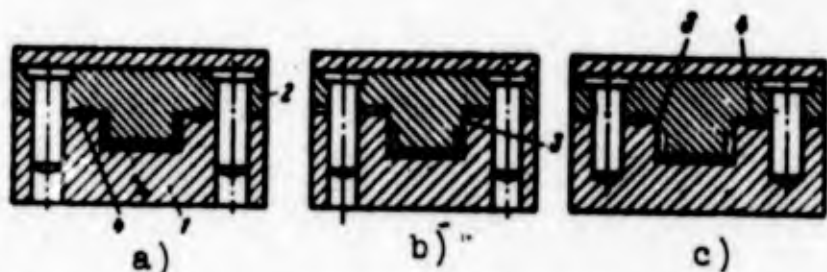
Diagrams of molds. a) open type; b) closed type; c) semi-closed type. 1) die; 2) punch; 3) guide retainer; 4) ducts for removal of burr.
